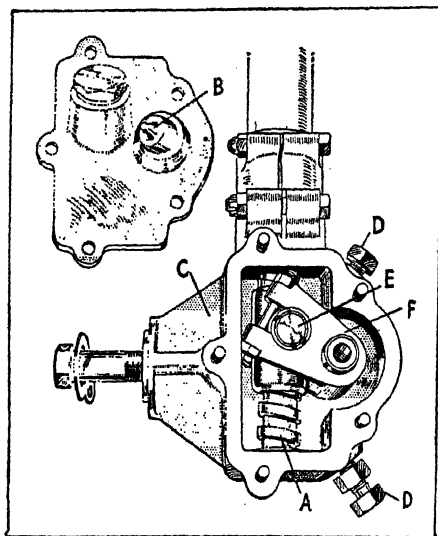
Armstrong-Siddeley Worm and Nut Steering Gear Box.
